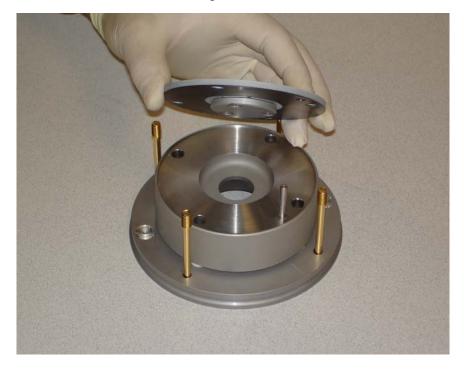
Remove the Thermal Transfer Plate and Sheet.
